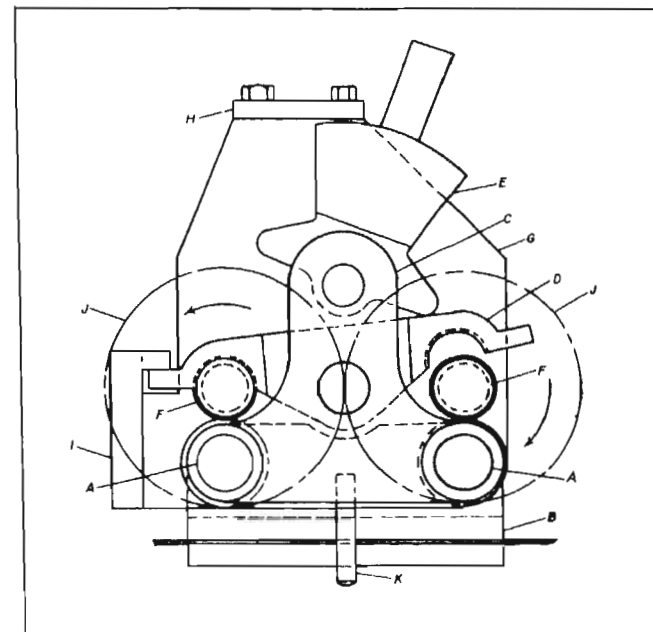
End view of mechanism that provides an adjustable reversing traverse movement.
